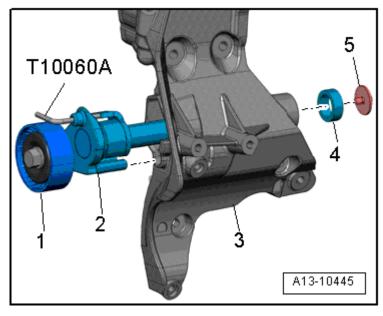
Identifying Tensioning Device For Ribbed Belt Courtesy of VOLKSWAGEN UNITED STATES, INC.
